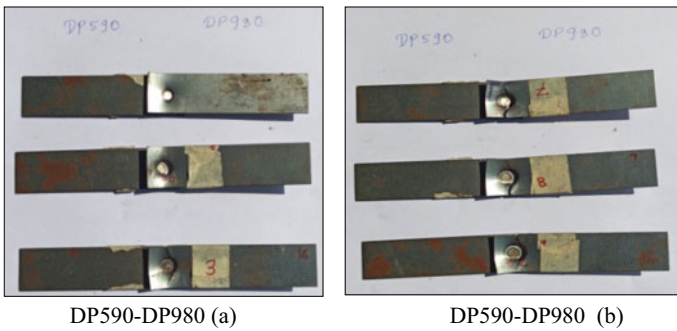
Pullout failure mode of the welded specimen (a and b)
